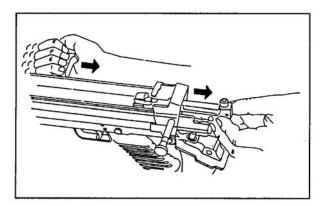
Removal of the operating rod, slide assembly, and bolt assembly
